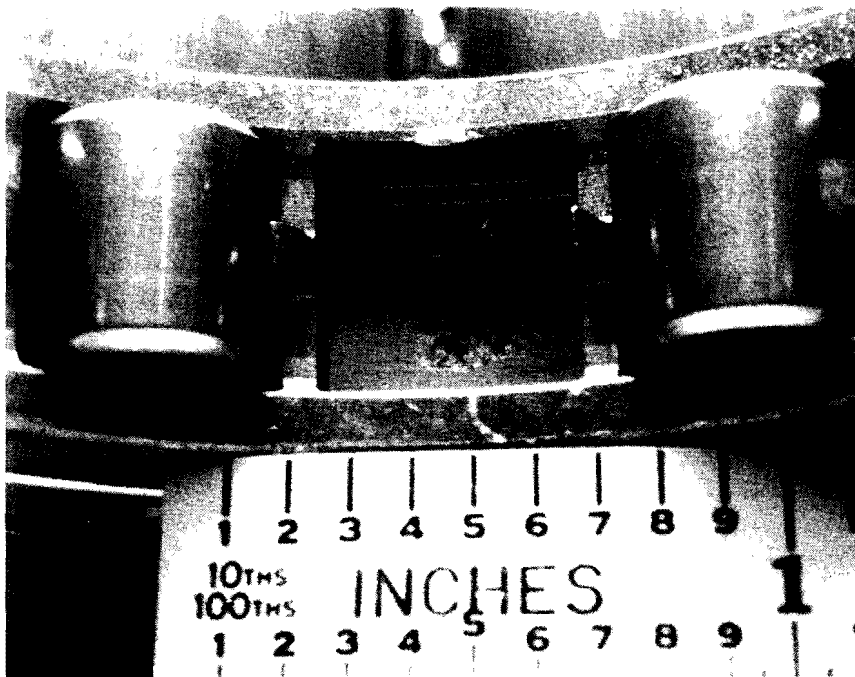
42-Degree Gearbox -310 Bearing Outer Race C/D,
